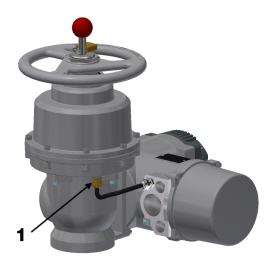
1...Cable gland on the failsafe assembly of the failsafe base actuator
